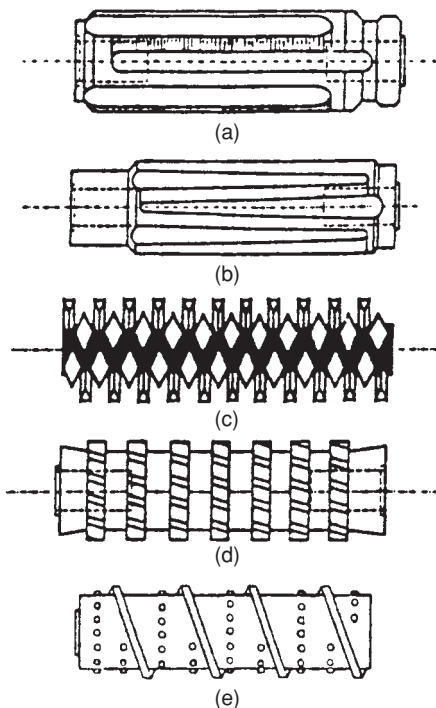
Mixing enhancers for single-screw extruders: (a) Maddock, straight; (b) Maddock, tapered; (c) pineapple; (d) gear; (e) pin.
